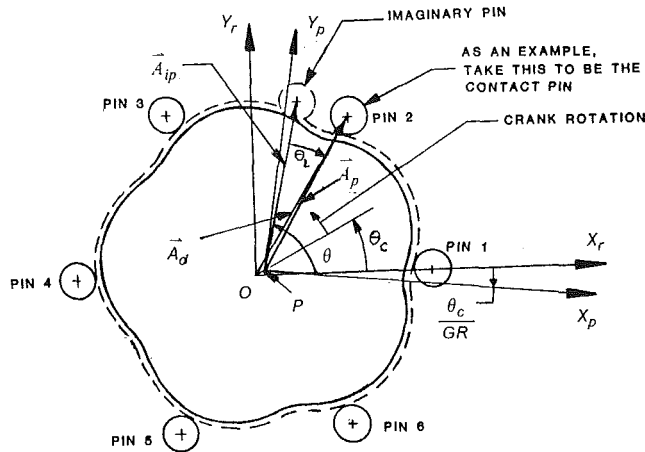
Coordinate system used for lag angle calculation ---- ideal planet gear profile ——— profile with machining tolerance
